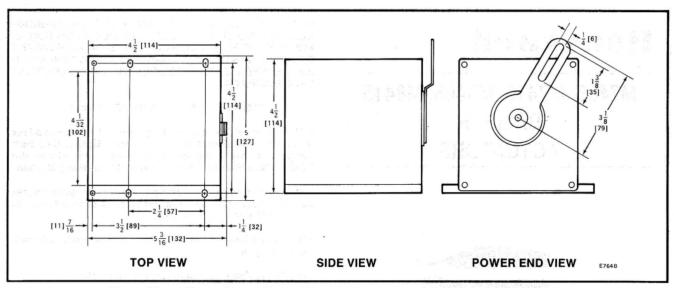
M7405, M7415, M8405, M8415 MOUNTING DIMENSIONS IN in. [mm IN BRACKETS].
